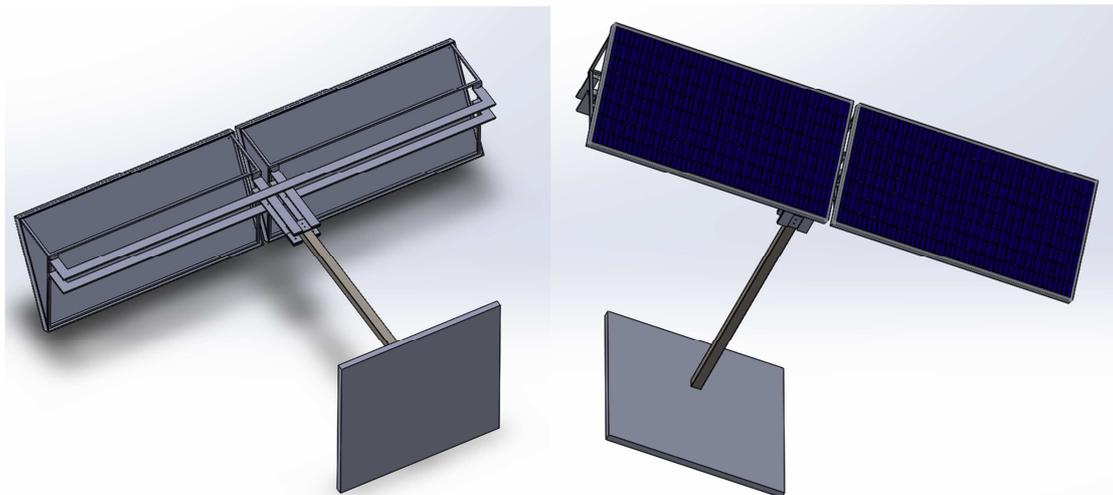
Fully assembled solar panel mount. On the left, a back view shows two mounting assemblies attached to the steel post, while the front view is on the right.
